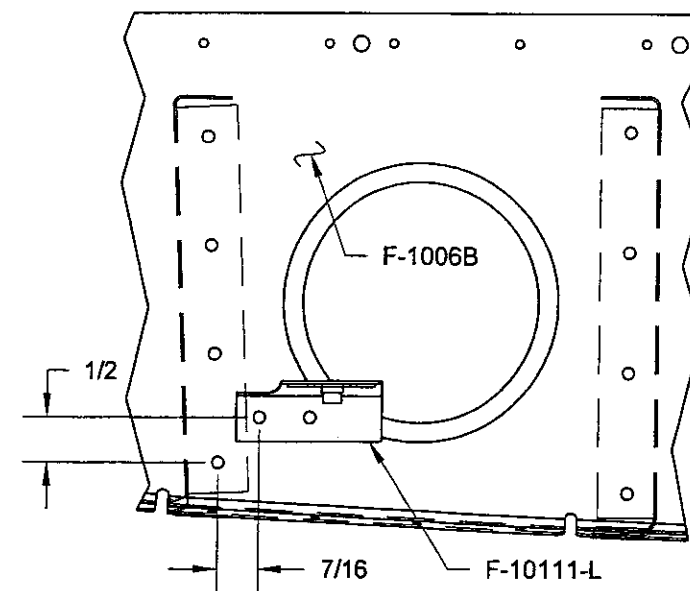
MATCH-DRILLING THE ANGLE BRACKET (REAR VIEW)
